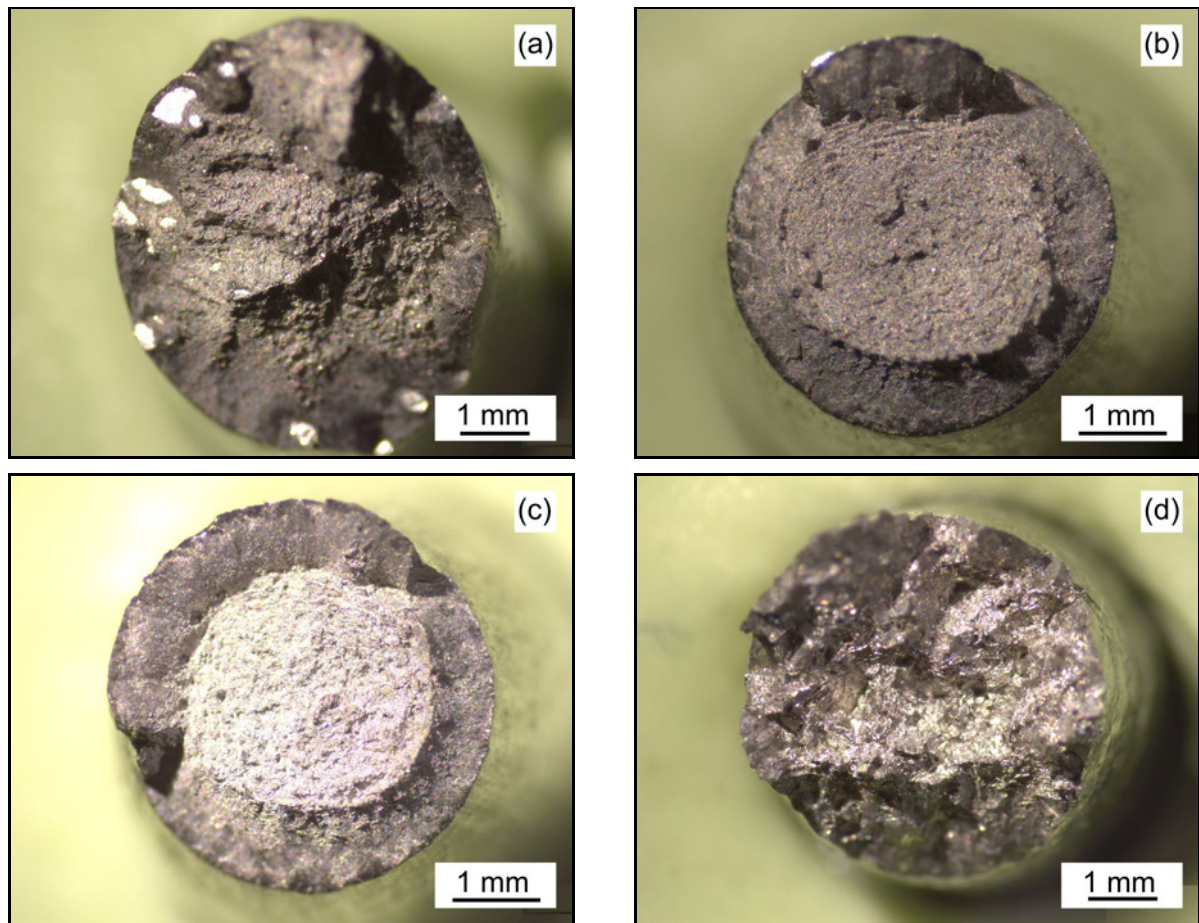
Fracture surfaces of vertically built samples: (a) as-built, (b) HIP1, (c) HIP2, and (d) HIP3.
